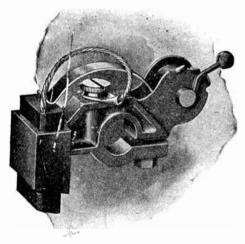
Western Electric brush holder. This holder consists of a rugged iron casting, elliptical in section, and supported from the commutator end bearing bracket in such a manner as to provide for the shifting of the brushes. A handle attached to the yoke aids not in this shifting and a thumb nut on the outside holds the whole brush gear in the desired position. The brush is fed through an accurately broached slot by a spring which mainbrush. The long lever arm of the spring is sufficiently flexible to take up any minor vibrations of the brush. The tension of the brush may be adjusted without lifting it from the commutator or disturbing any of the other holders. The brush may be removed for finspection by throwing the spring cut of notch. The brush is connected to the holder by flexible copper pig tails of ample current carrying capacity.
